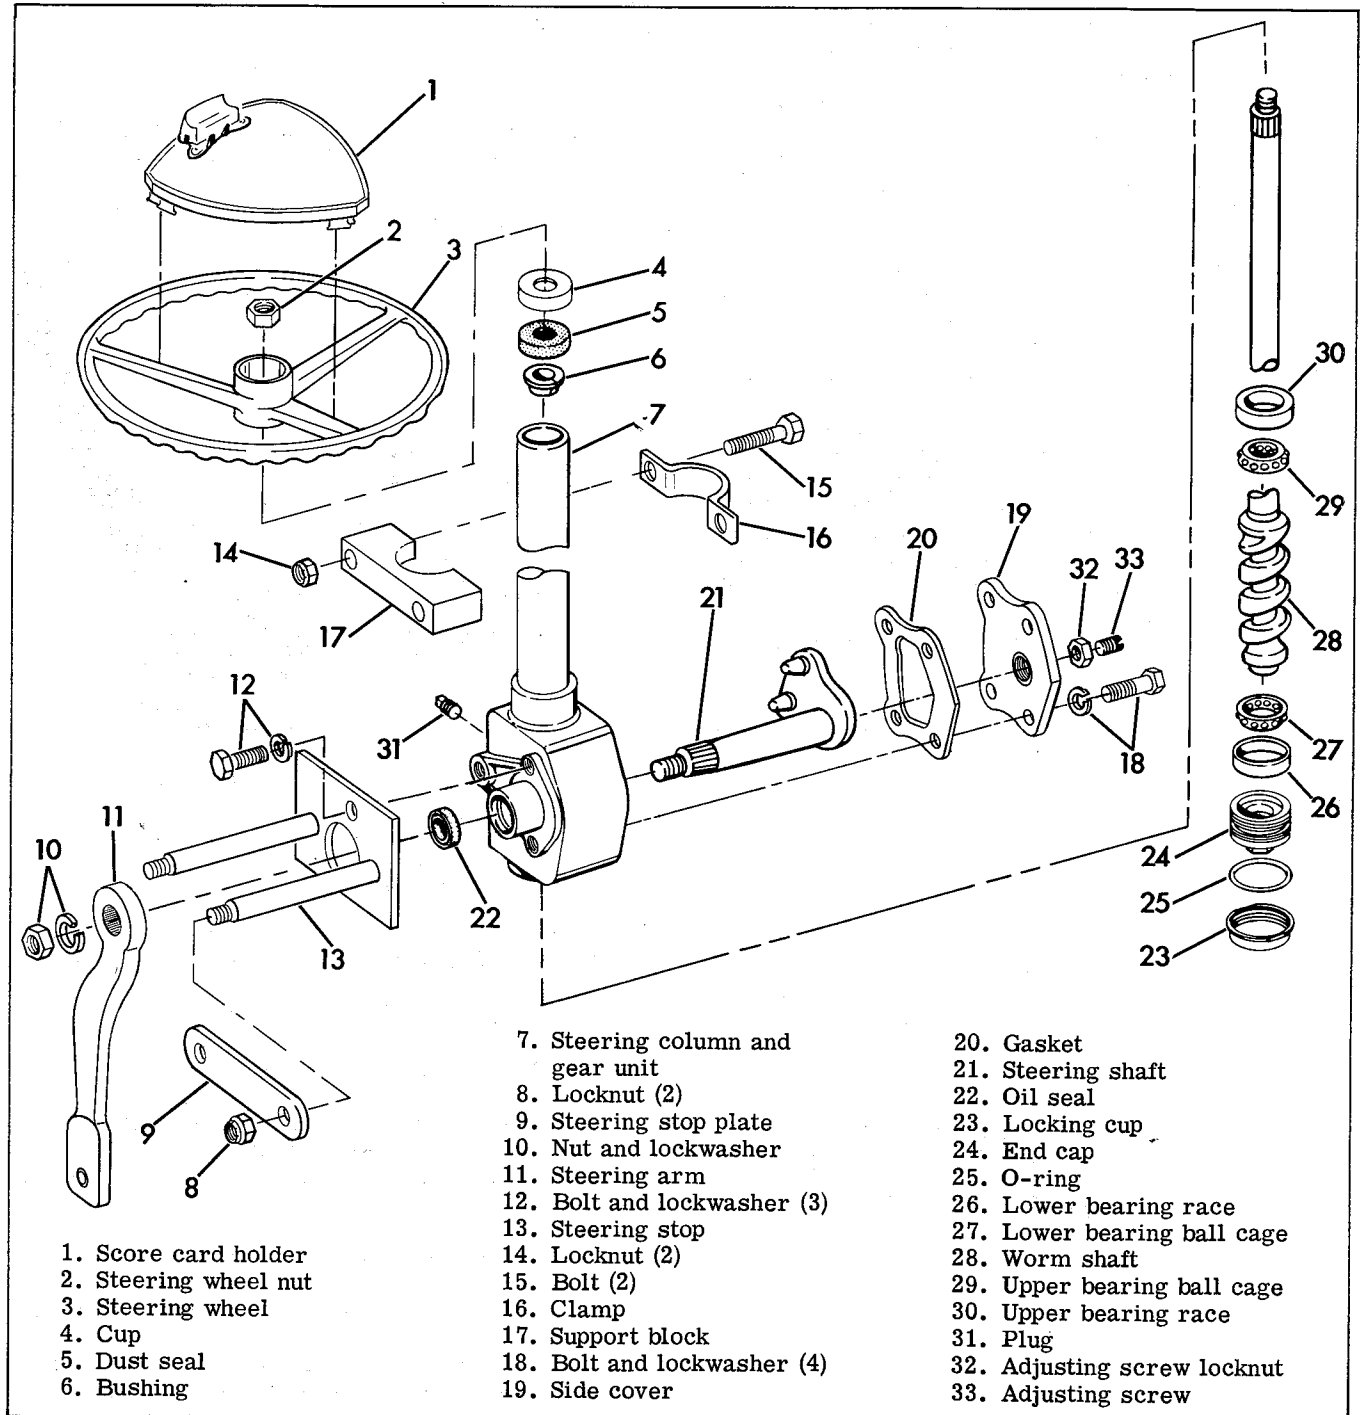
Steering Wheel and Steering Gear - Exploded View
